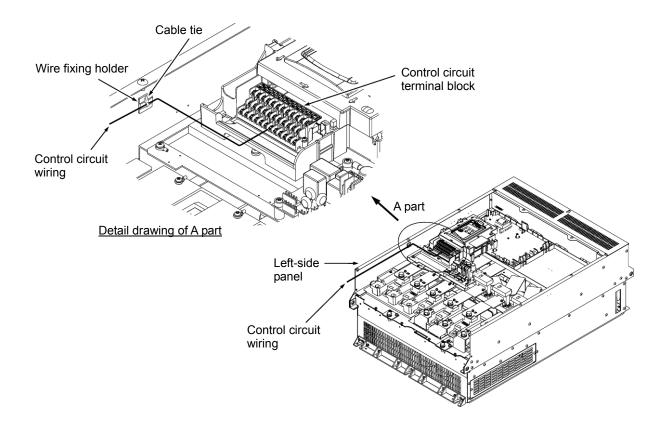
Control Circuit Wiring Layout and Secured Position
